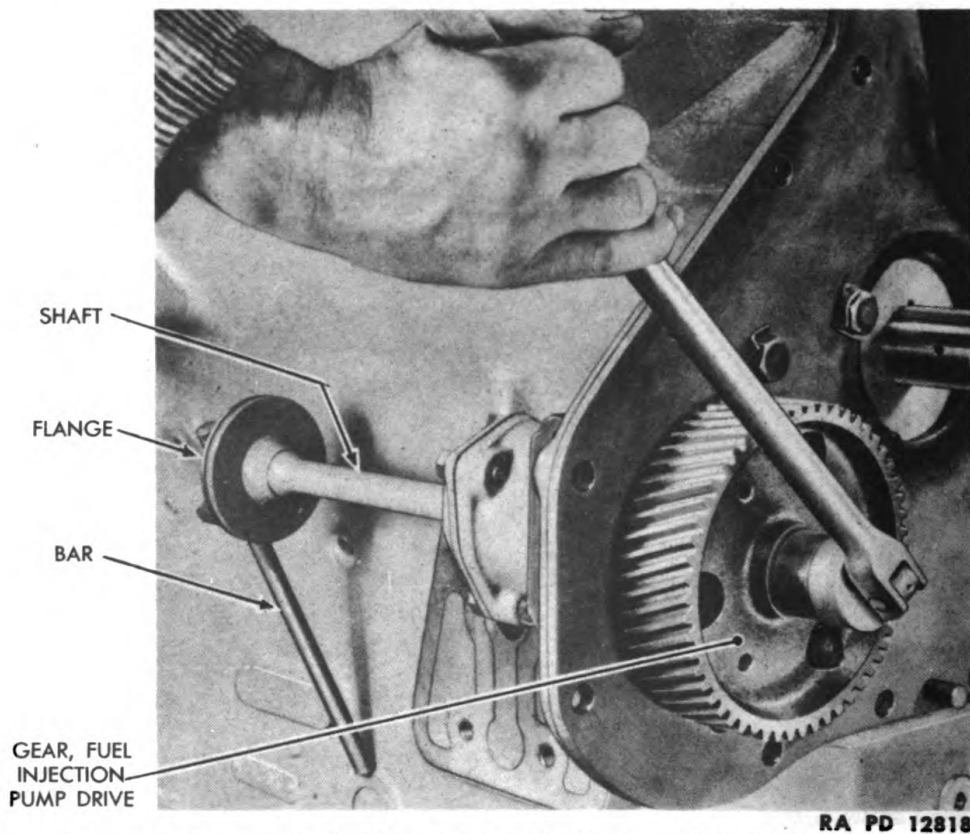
Fuel Injection Pump Shaft Gear Nut Removal
